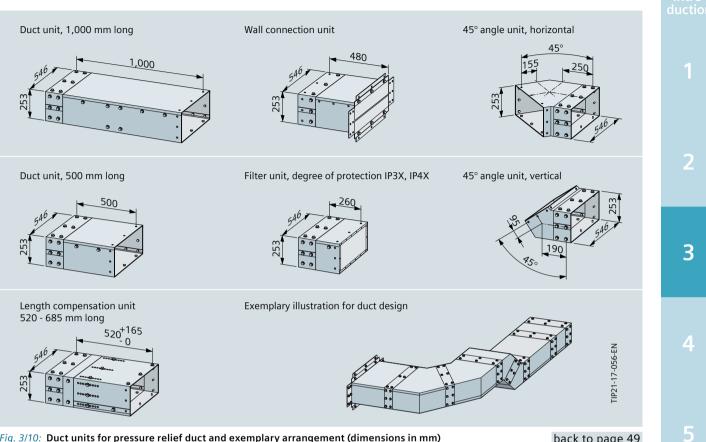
/10: Duct units for pressure relief duct and exemplary arrangement (dimensions in mm)
